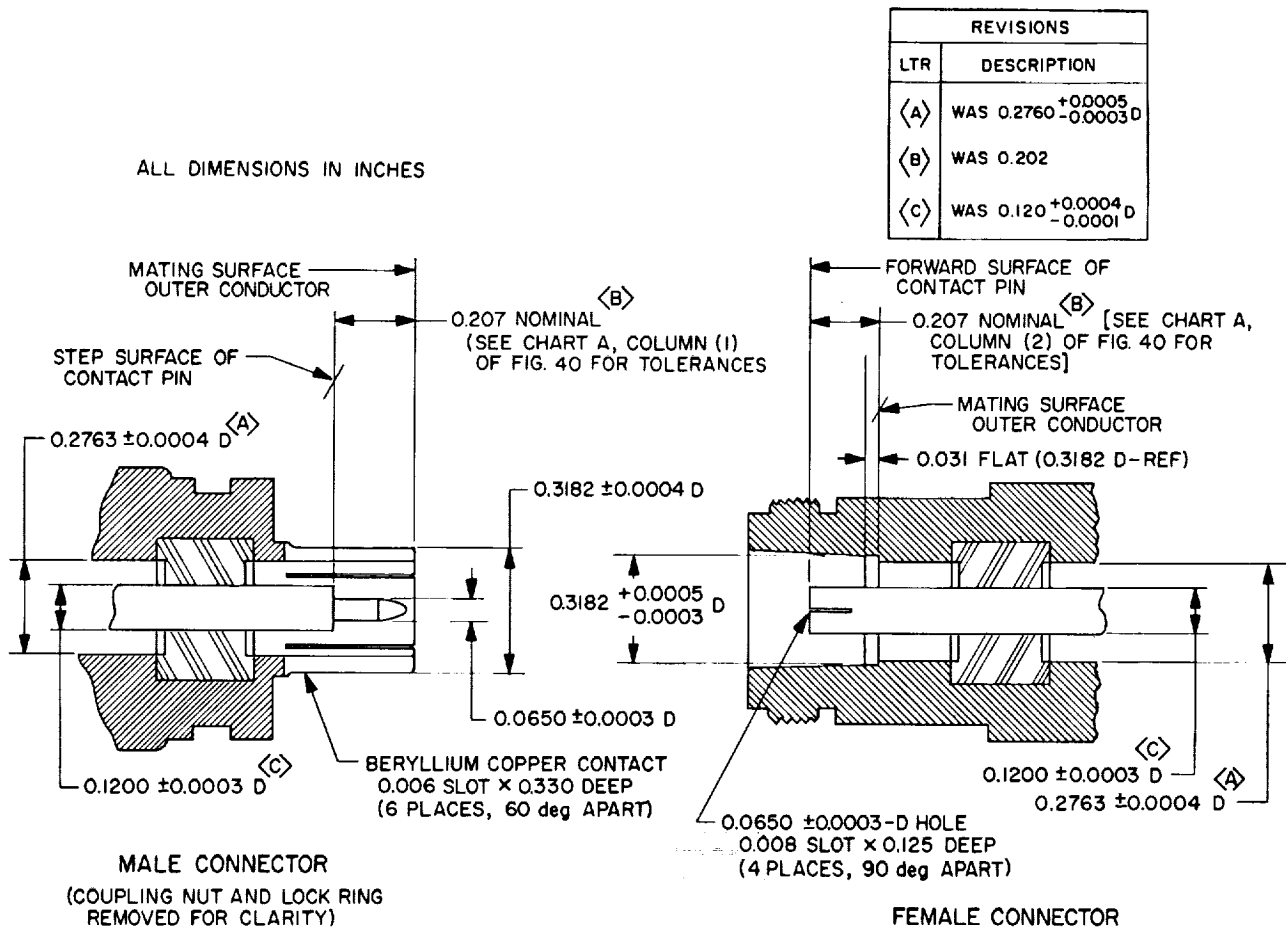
Blue Dot Type N connectors, critical mating dimensions; courtesy of MCC
